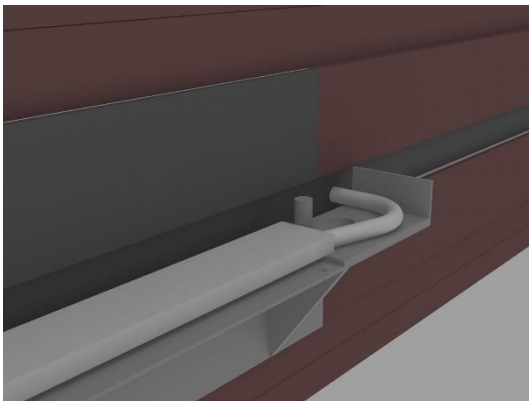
The spine of the engine is screwed onto the stationary part of the frame. It is made of welded steel parts. On the left and right ends are holes drilled into the horizontal surface, in which the axle is inserted for the next step. A nylon film is needed to separate steel from the aluminium profile to prevent increased corrosion.
